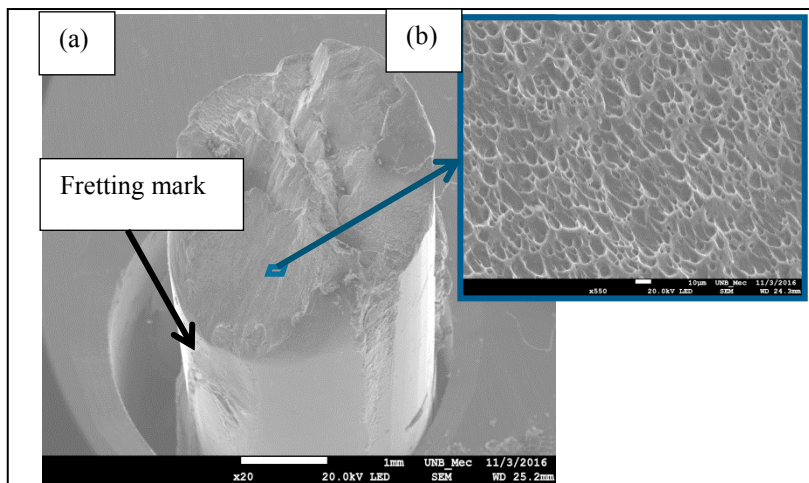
Fracture surface of an AAC Orchid conductor showing the fretting mark (a) and (b) the dimples.
